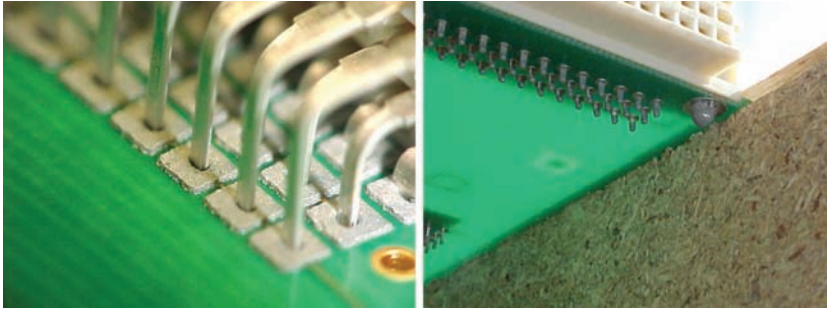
Manual insertion of connector after printing of solder paste (left). Protruding connector pins on the base of the printed board assembly prior to reflow (right). Paste is visible on the connector pins and the hold-down feature.
